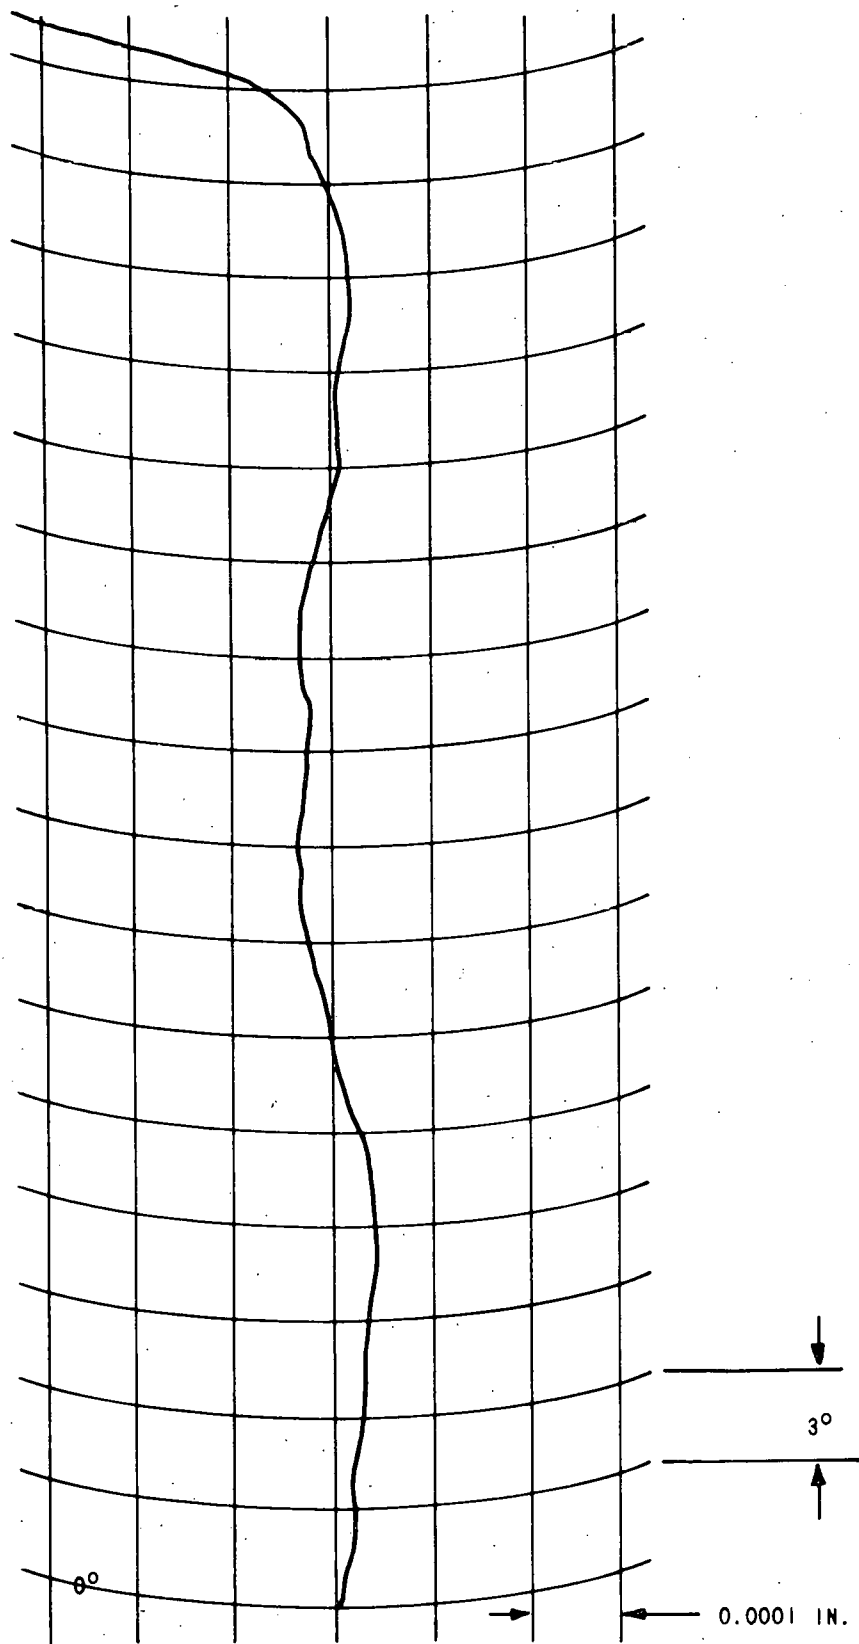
Typical Involute Profile Recorded on Fellows 12-M Involute Machine
